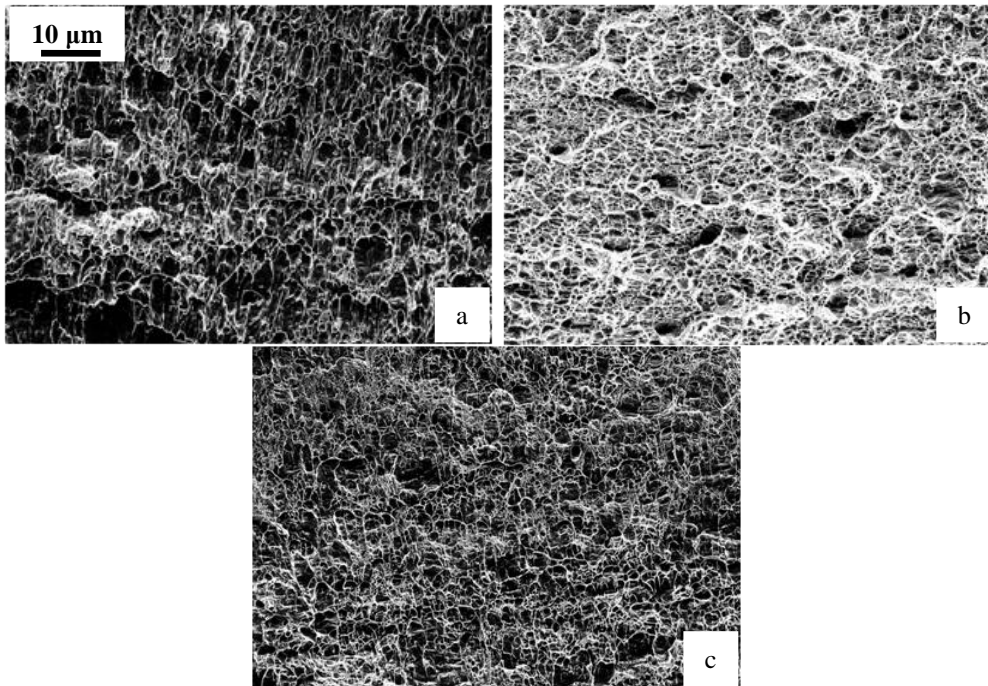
Higher magnification of fracture surfaces for the samples tested at -80 °C of X70_A steel: (a) L-S, (b) D-S and (c) T-S (additional notch type specimens, Fig. 3.2b).
